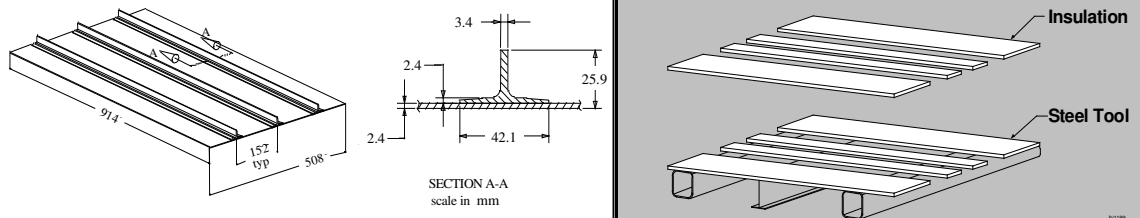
A steel tool covered with insulation accommodates prefabricated stringers, upon which a thermoplastic laminate can be placed.
